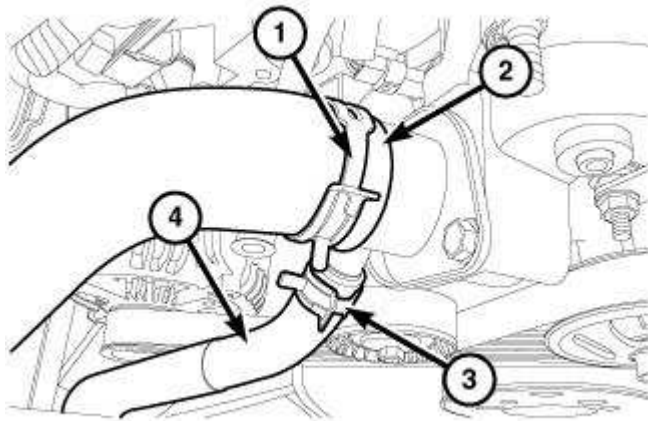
Upper Radiator Hose, Clamp, Oil Cooler Return Line Hose & Clamp
